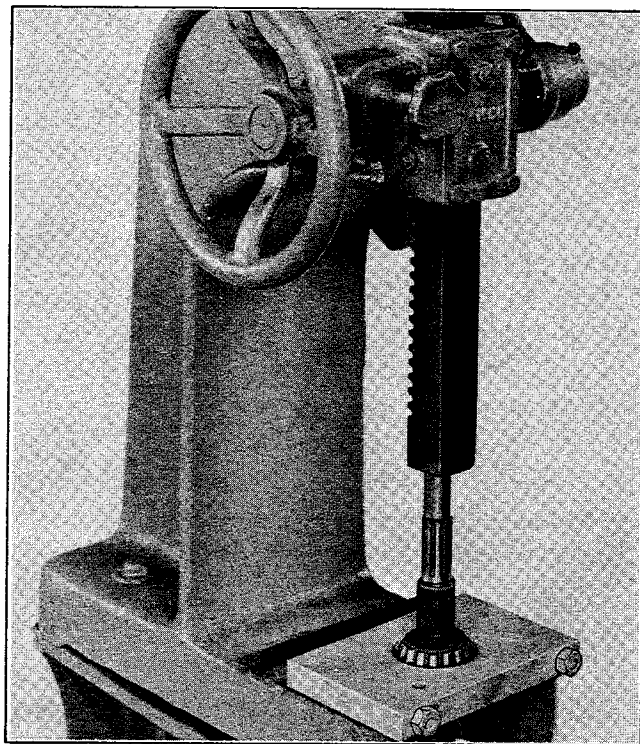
Removing Pinion Shaft Rear Bearing Cone
